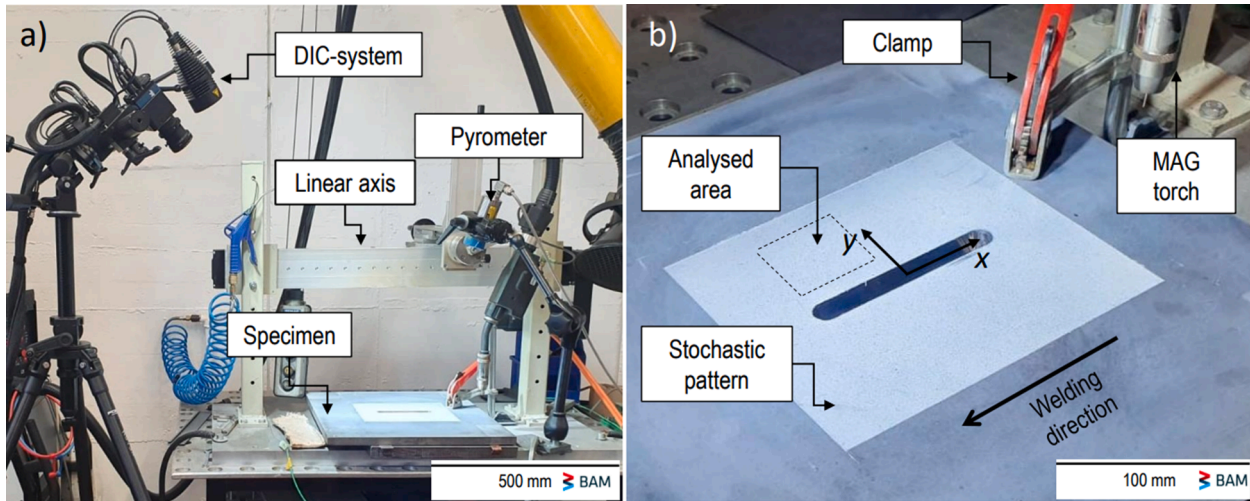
(a) Test setup welding experiments, (b) close-up prepared specimen with DIC-area.
